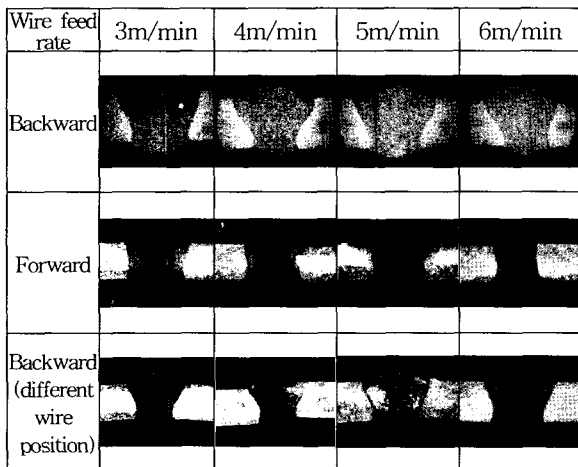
Cross section of the weld beads obtained for the different welding process
